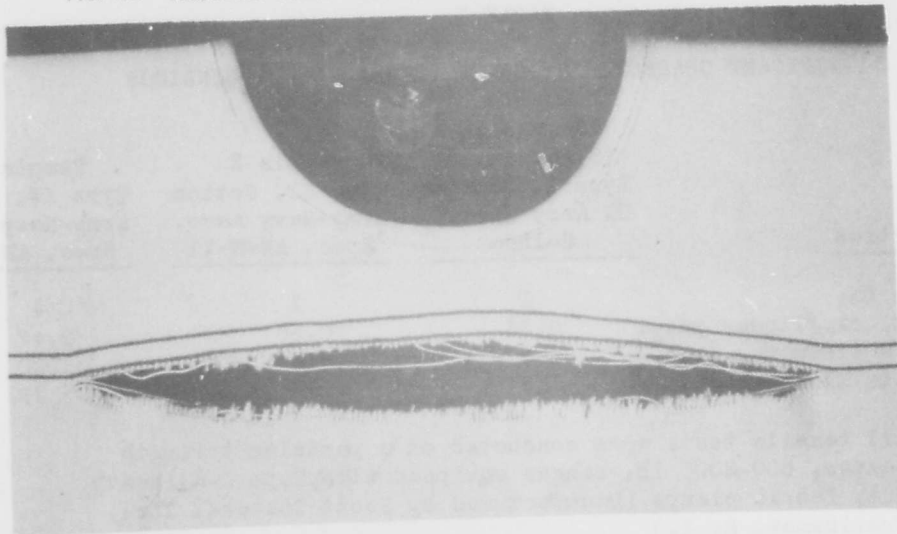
LABORATORY IMPACT FAILURE (REDESIGNED CENTER CUTOUT, SPECIFICATION FABRIC)
